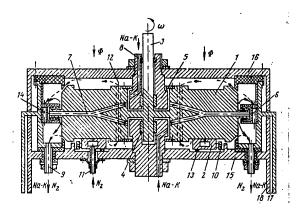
Rotor assembly of the experimental UUG. 3 -- rotor shaft; 17 -- output bus.
